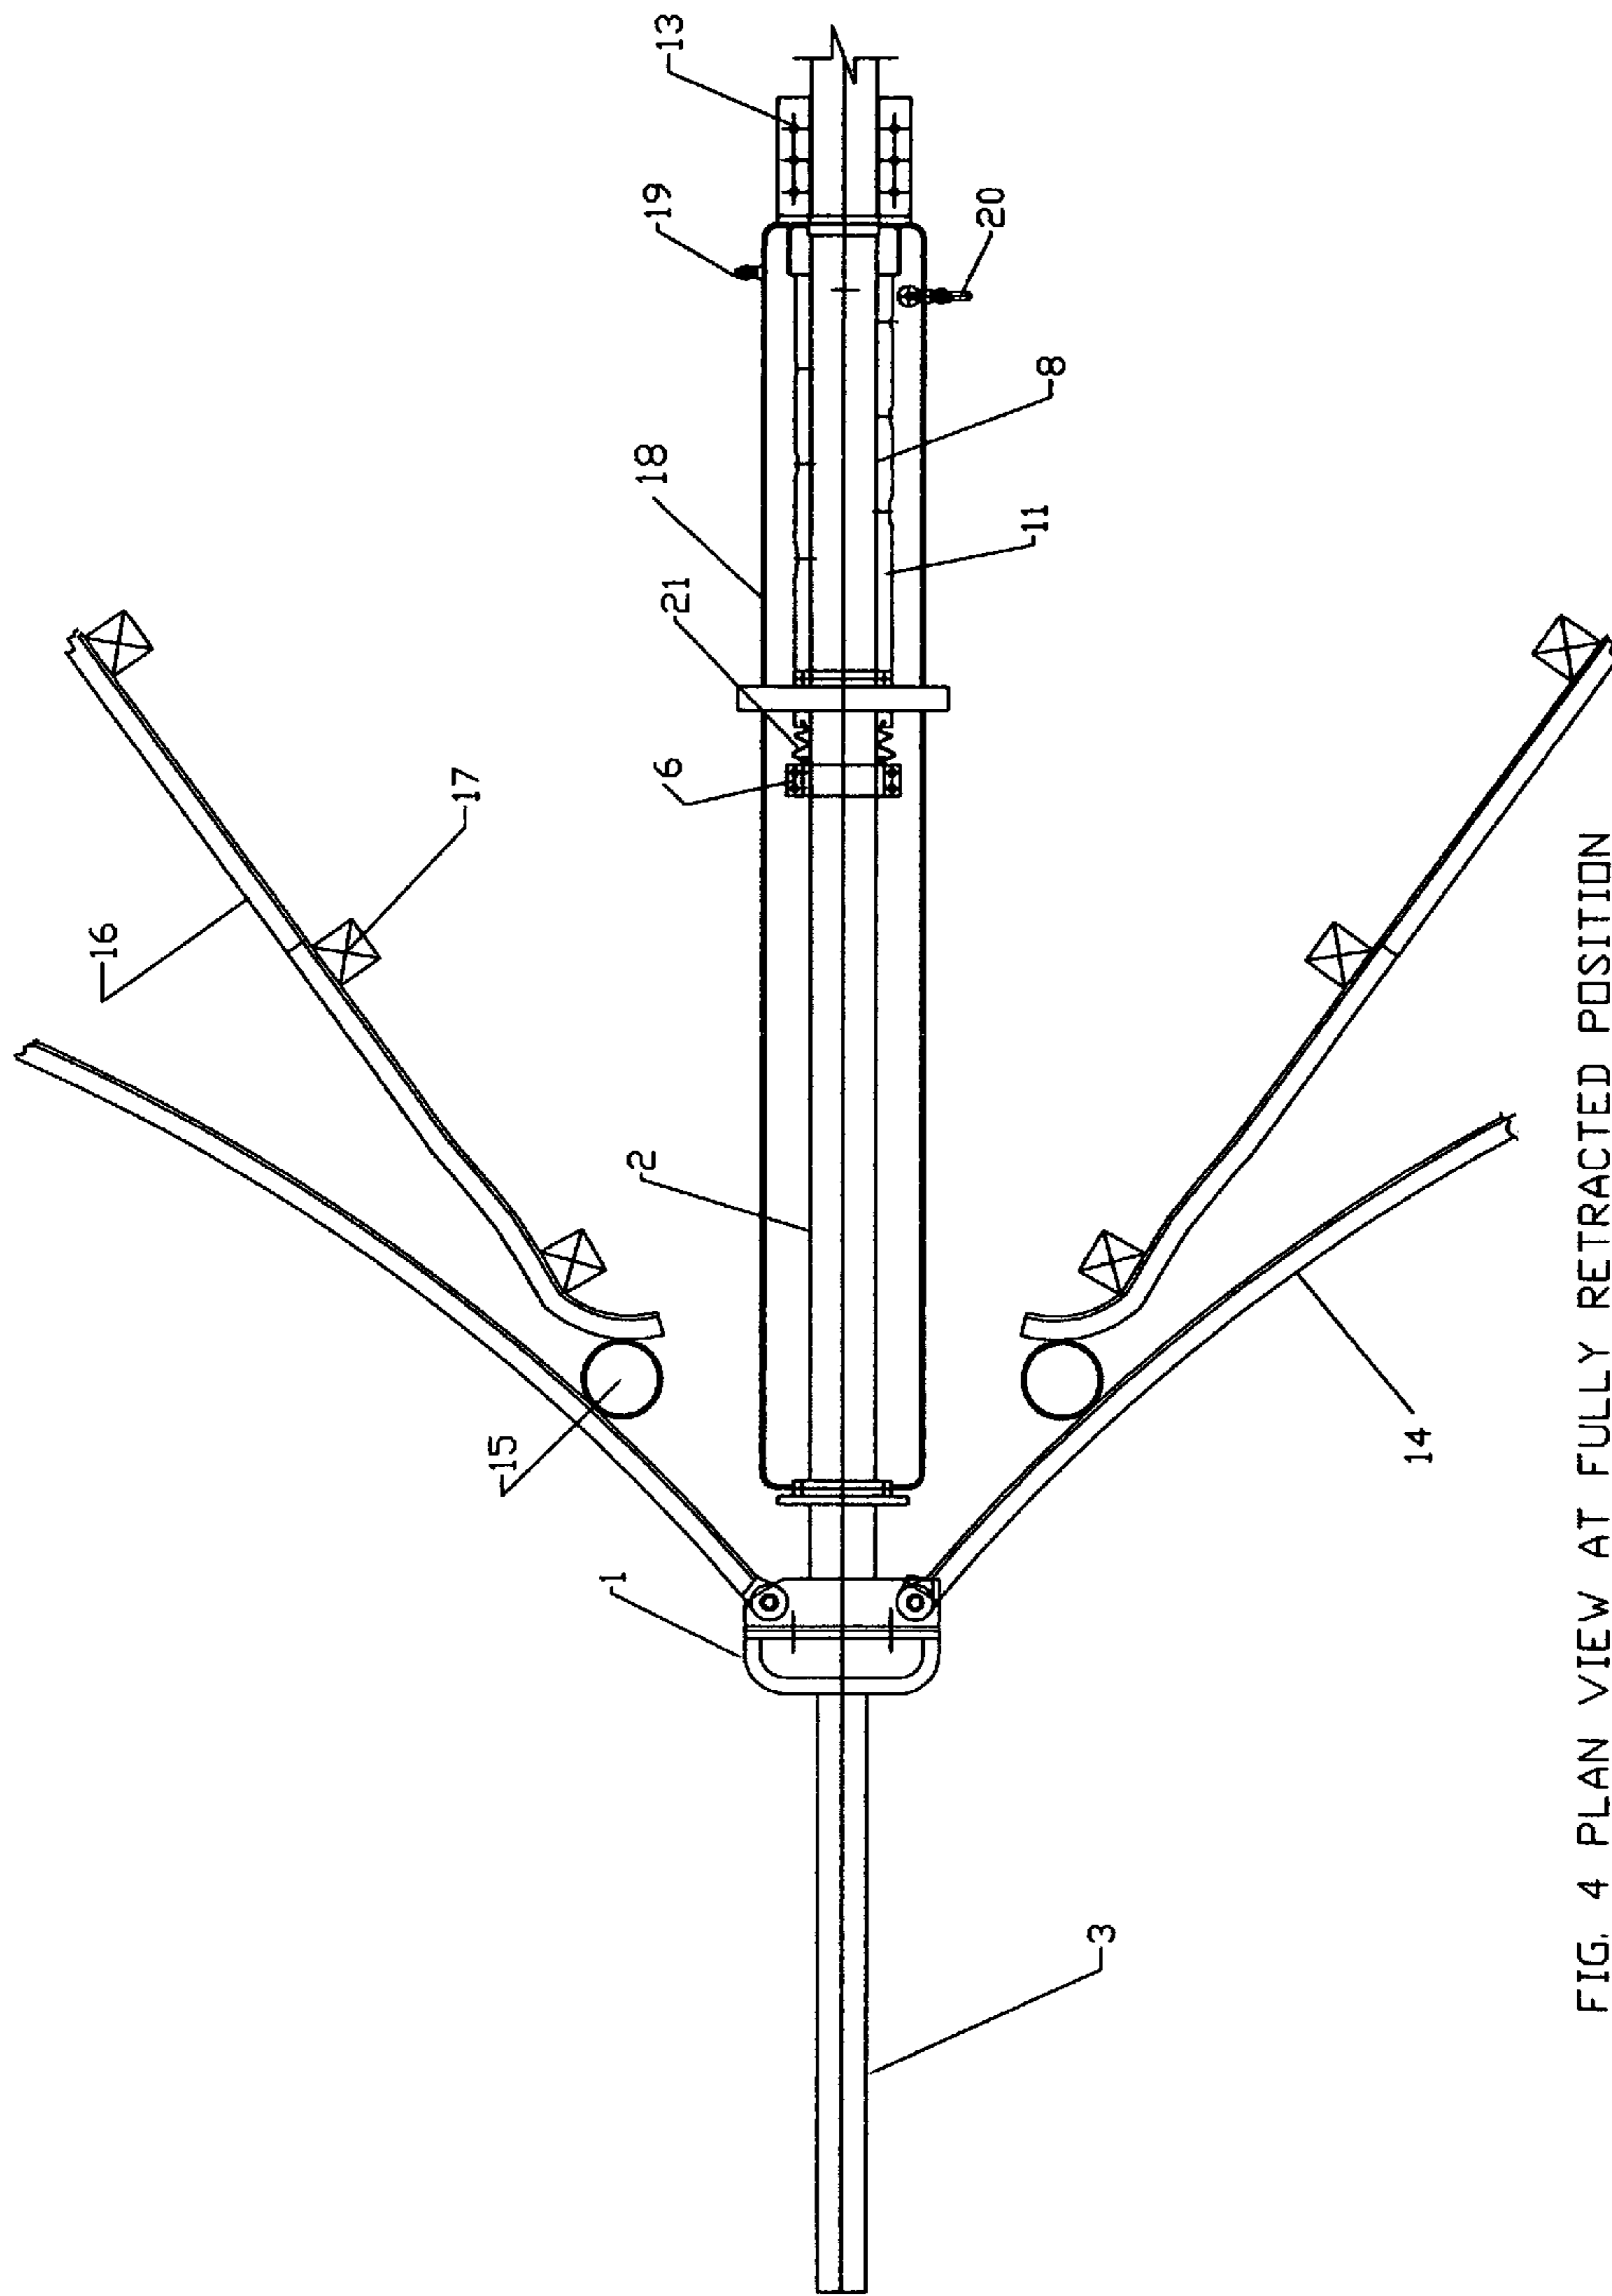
PLAN VIEW AT FULLY RETRACTED POSITION
